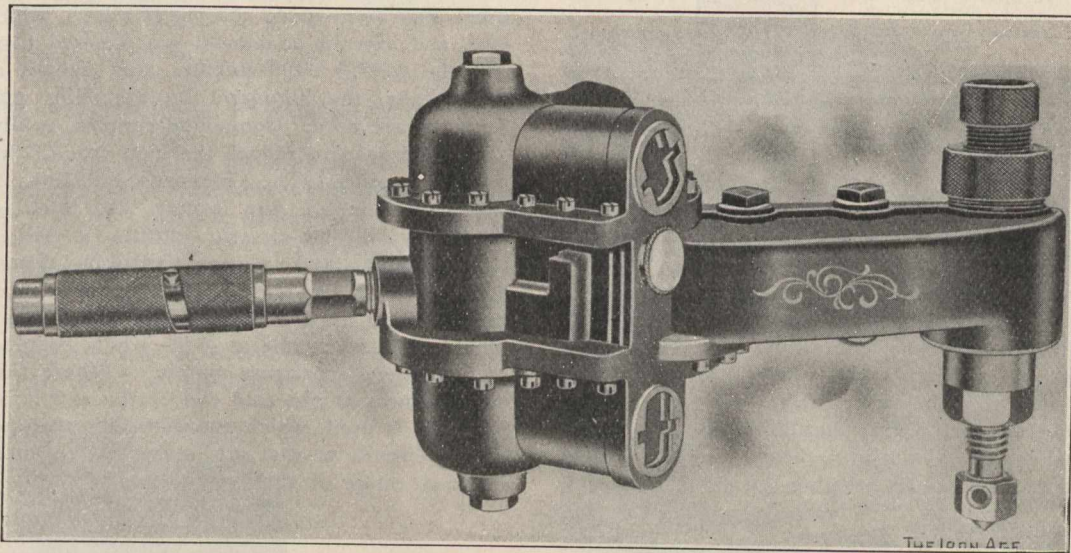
The Little Giant Pneumatic Drill for Corner Work, Made by the Chicago Pneumatic Tool Company.
